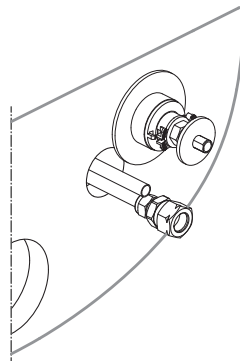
Rear view of panel shown with pipe coupler fitted. Alternatively elbows can be used.
